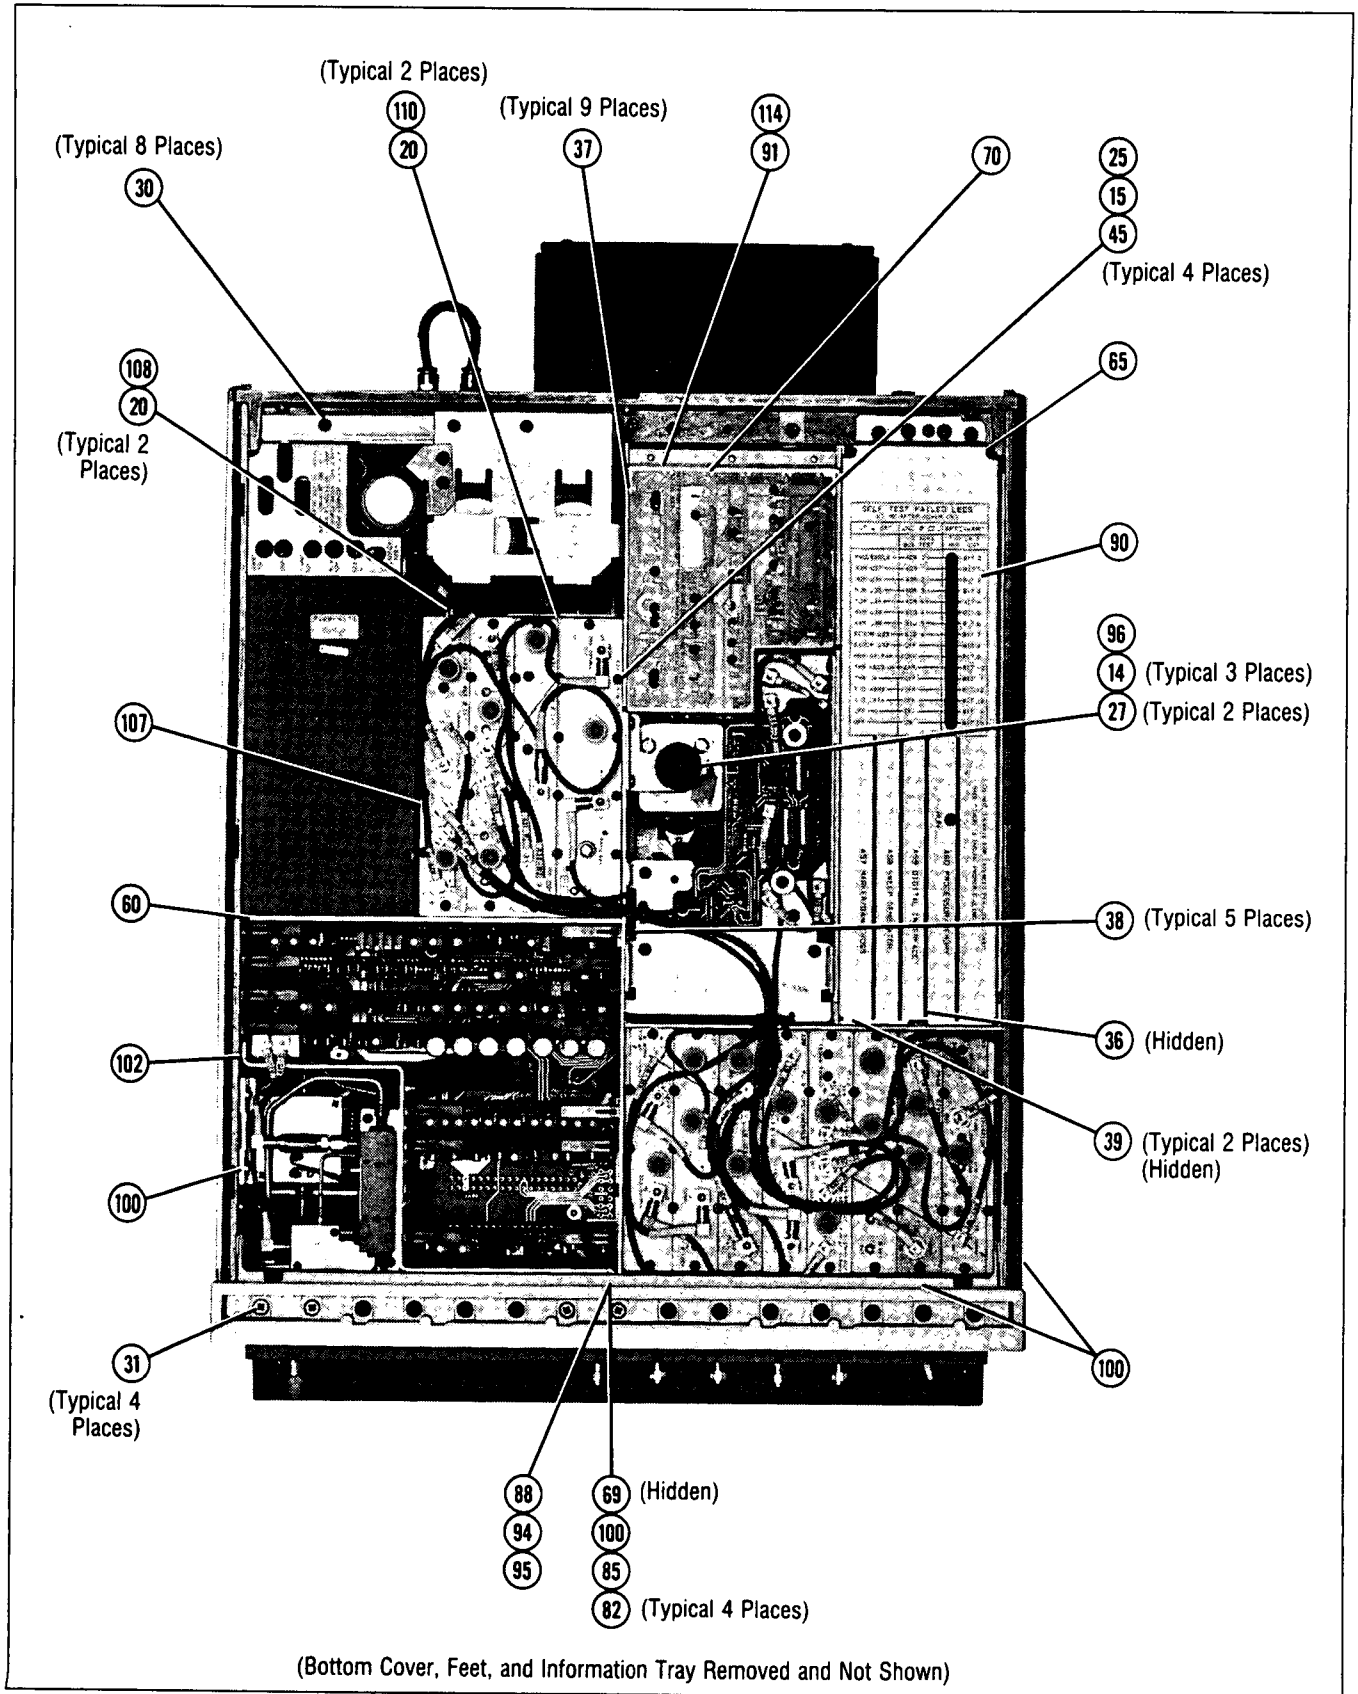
Miscellaneous Mechanical & Chassis Parts (5 of 6)
